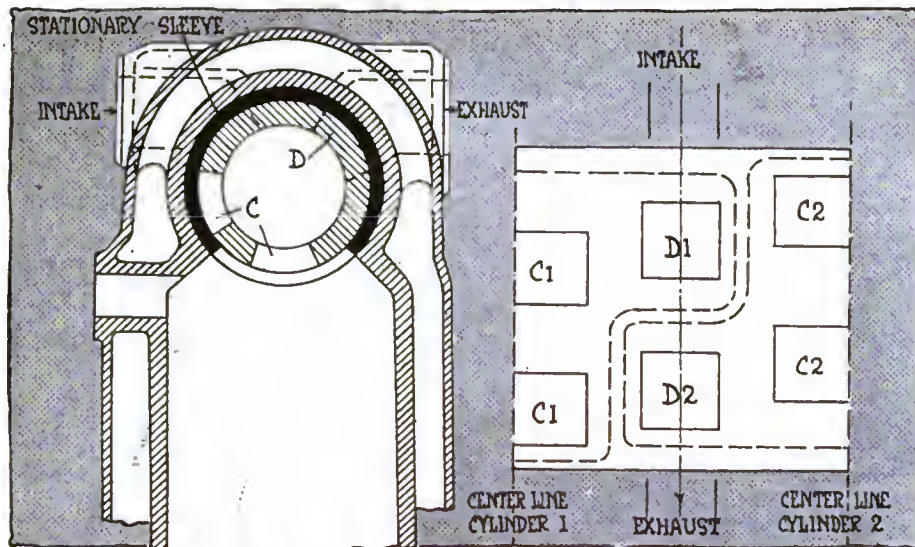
Type of valve in which the interior forms part of the combustion chamber.
